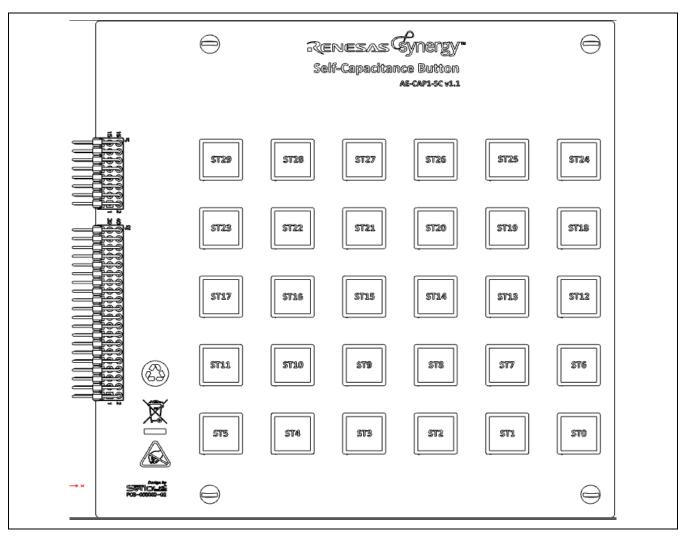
AE-CAP1-SC Touch Application Board Overall Component Placement, Top
